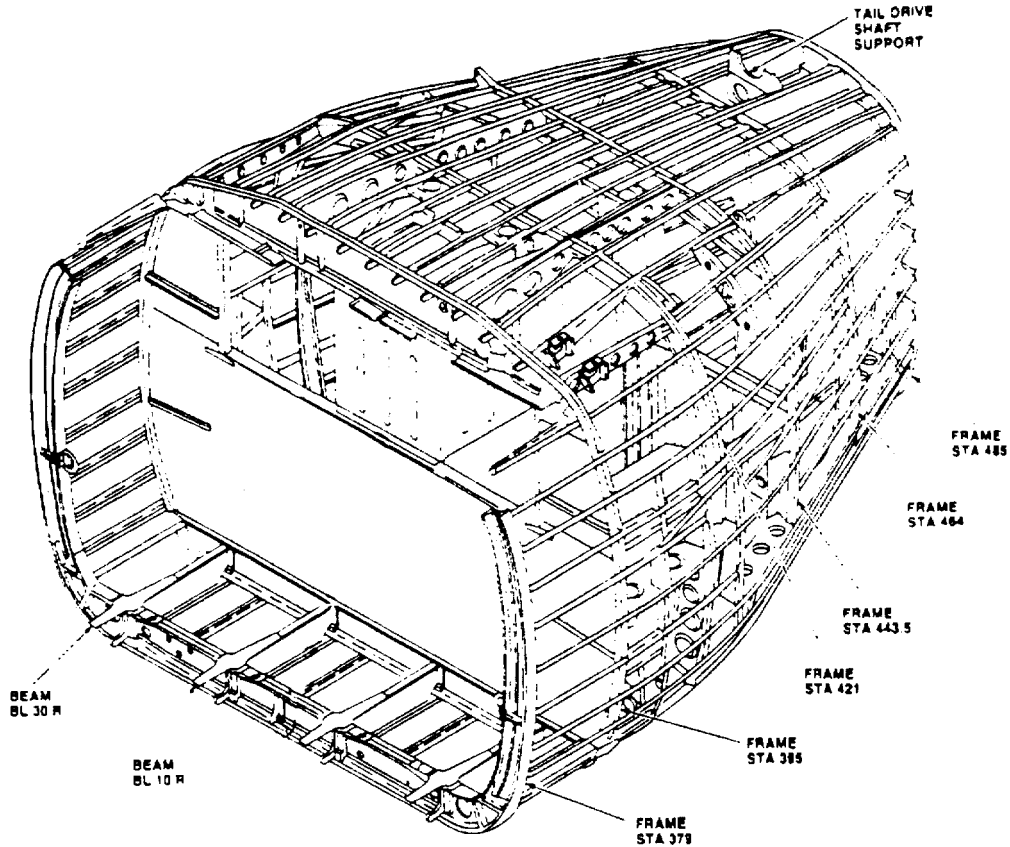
TRANSITION SECTION (AIR FORCE PAVE HAWK ONLY)
